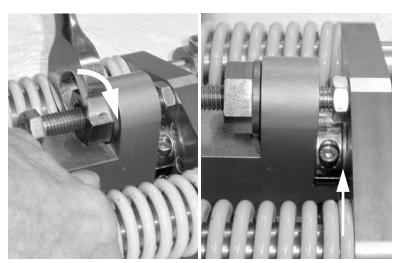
Tighten the spring tension nut (left photo) until the split ring lock is tight against the end plate, with no gap (right photo).
